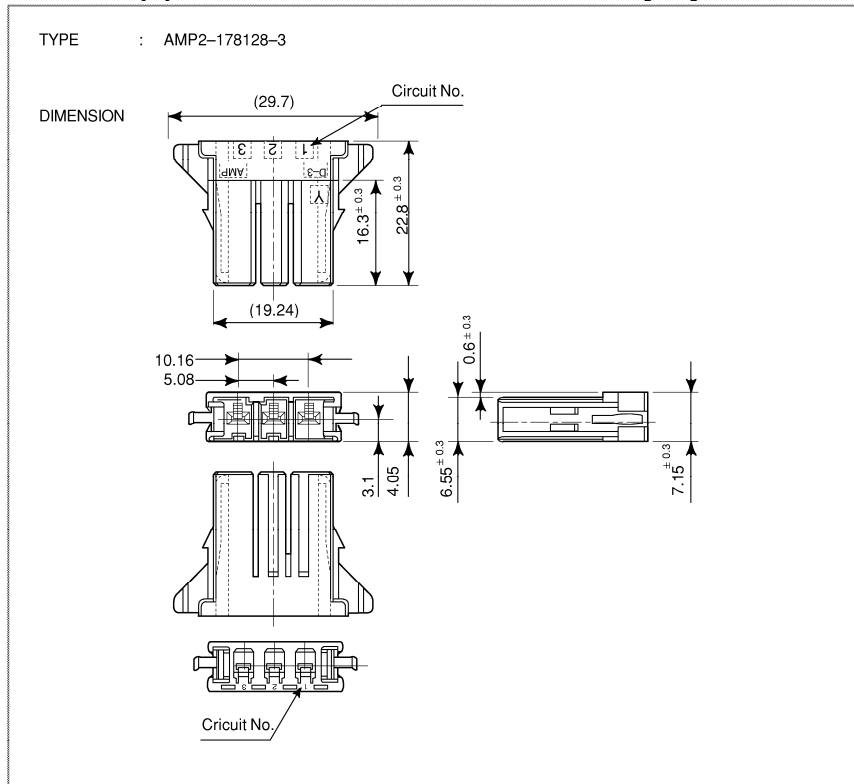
(c) Connector (3) for +24 V power supply manufactured by Tyco Electronics
